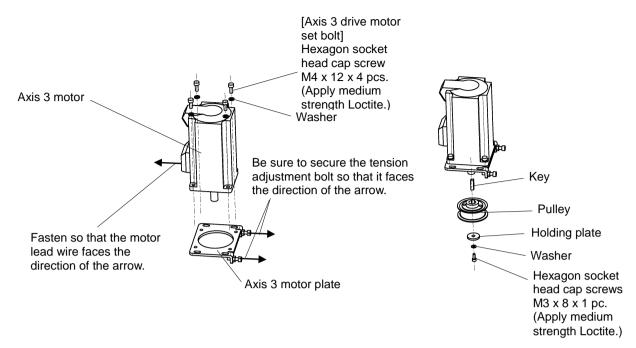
Mounting axis 3 pulley and plate (KHL-500, KHL-600, KHL-700)
